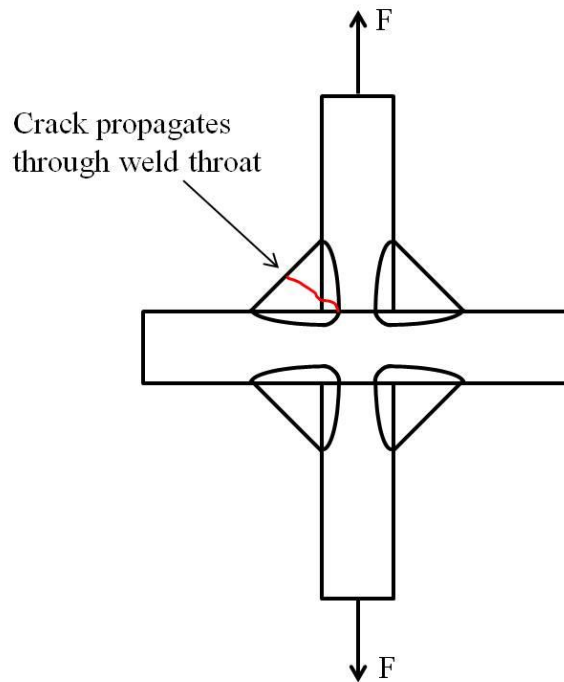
Typical Cruciform Joint with Fatigue Crack
